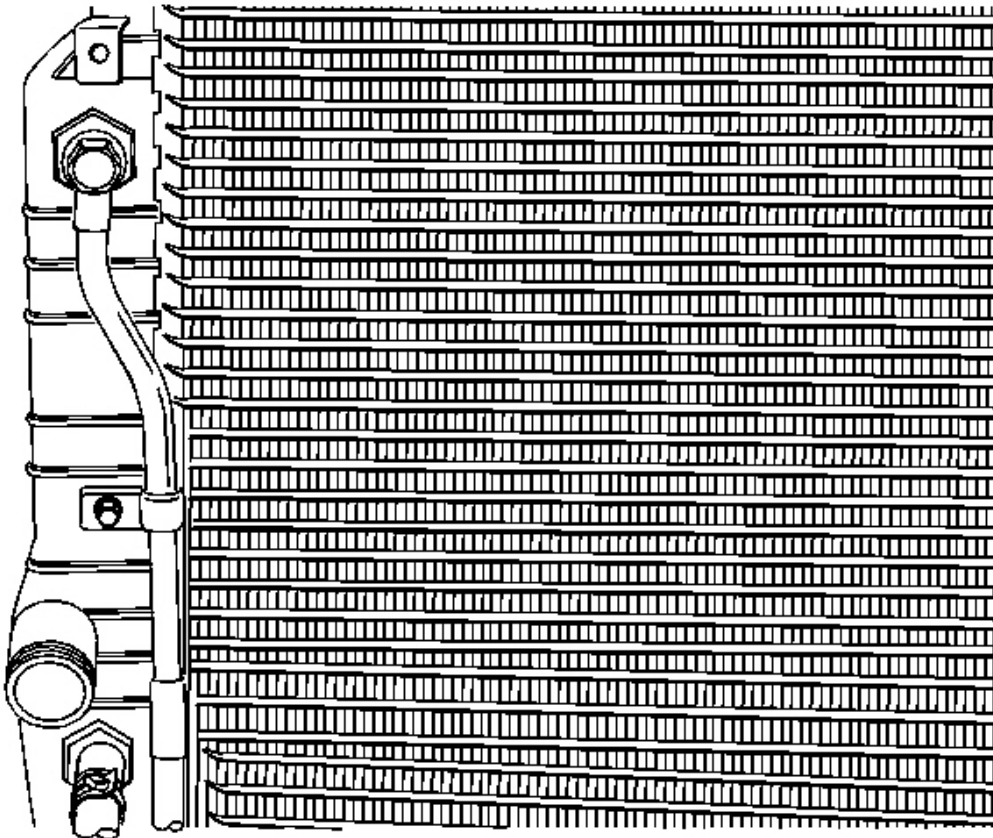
Front Outlet Pipe, Union Bolt & Radiator
